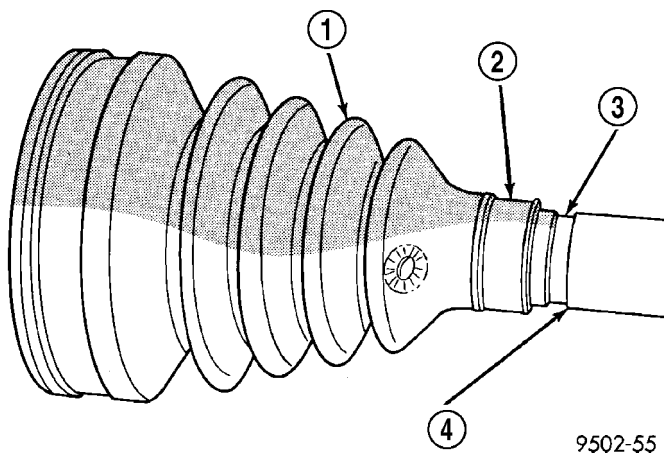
Sealing Boot Installation on Interconnecting Shaft
